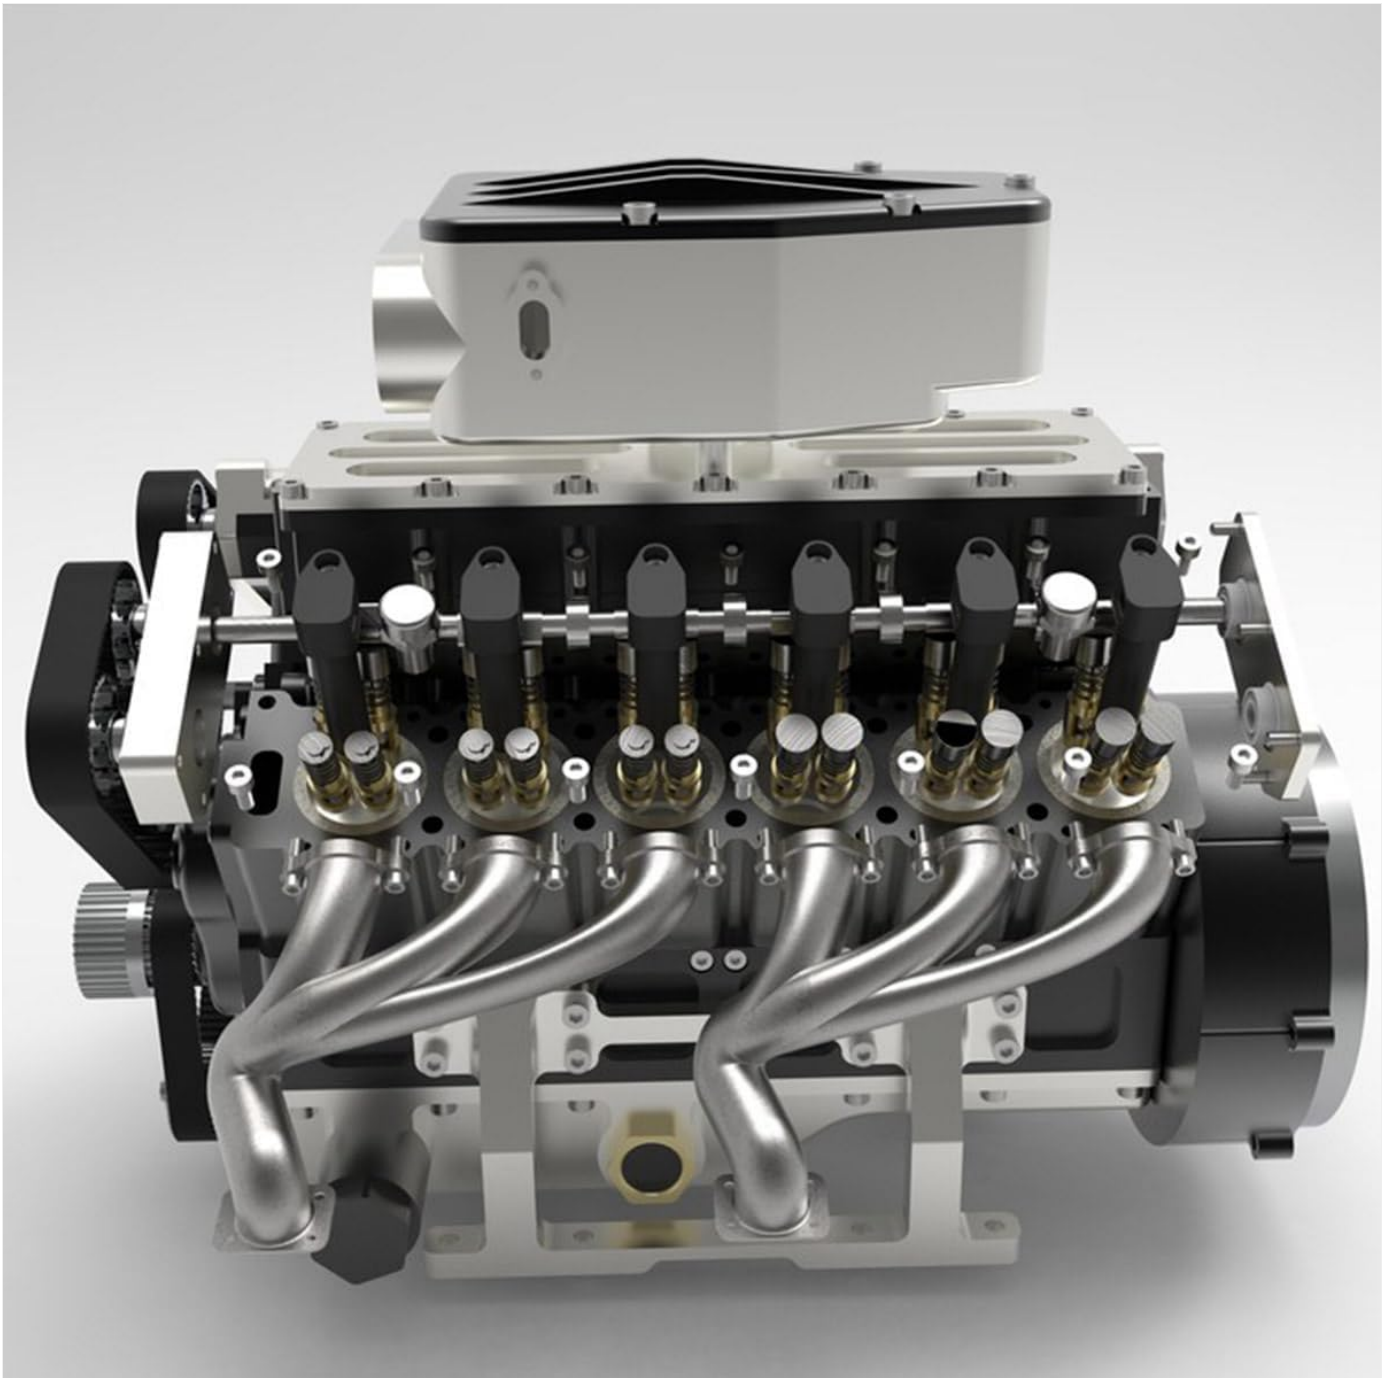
Close-up view of the top of the engine, showing the spark plug and coil arrangement.
